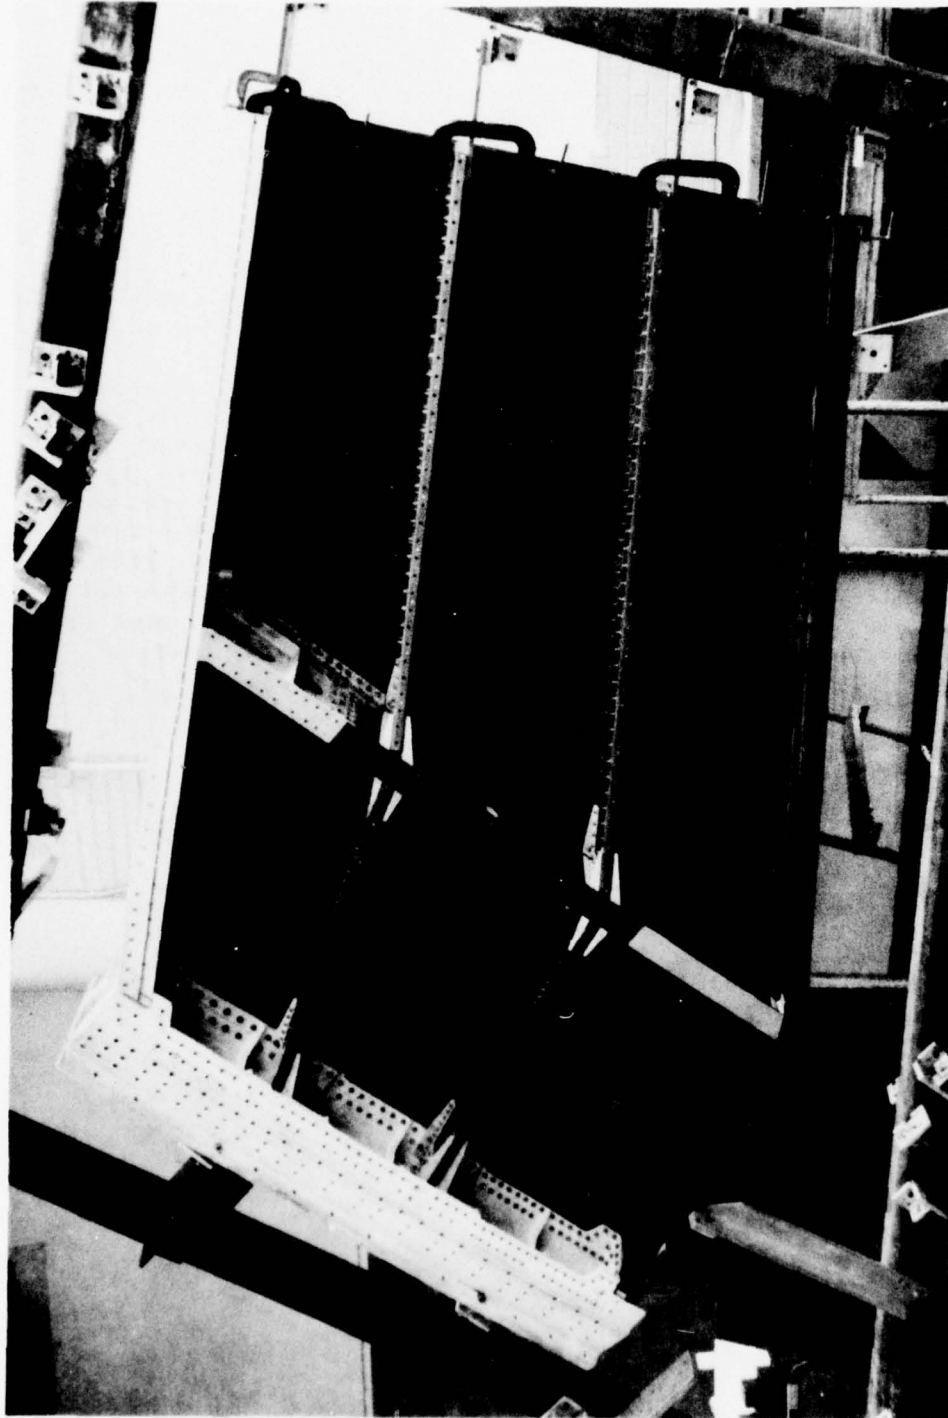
COMPOSITE WING BOX SUBSTRUCTURE ASSEMBLY
